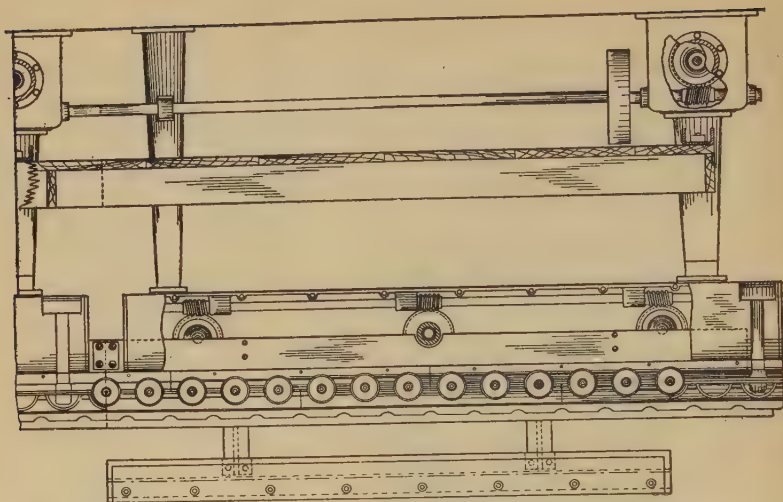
Side Elevation of Washing Machine, Shown in Fig. 105 above.
